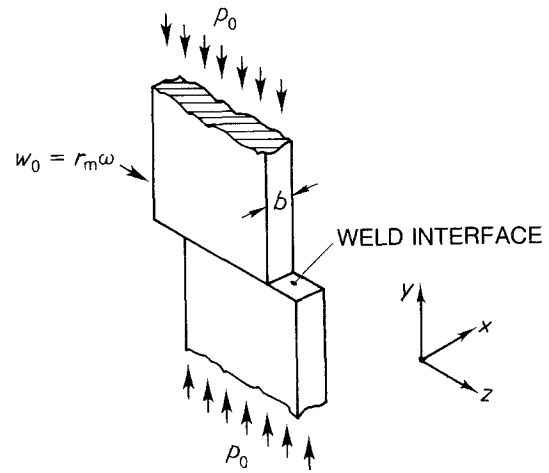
One-dimensional model for the friction (spin)-welding process. w_0 = weld velocity, p_0 = weld pressure.
